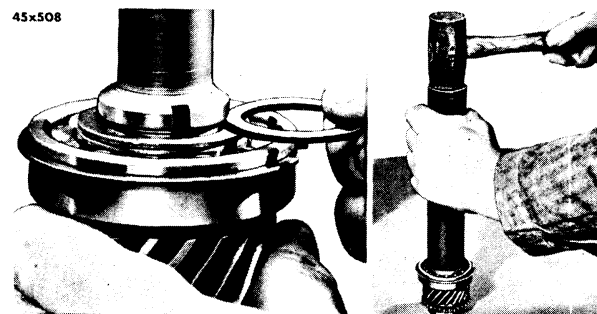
Selection and Installation of Drive Pinion Bearing Snap Ring
